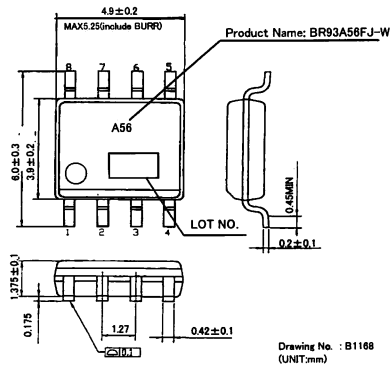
(c) PHYSICAL DIMENSION SOP-J8 (BR93A56FJ-W)
